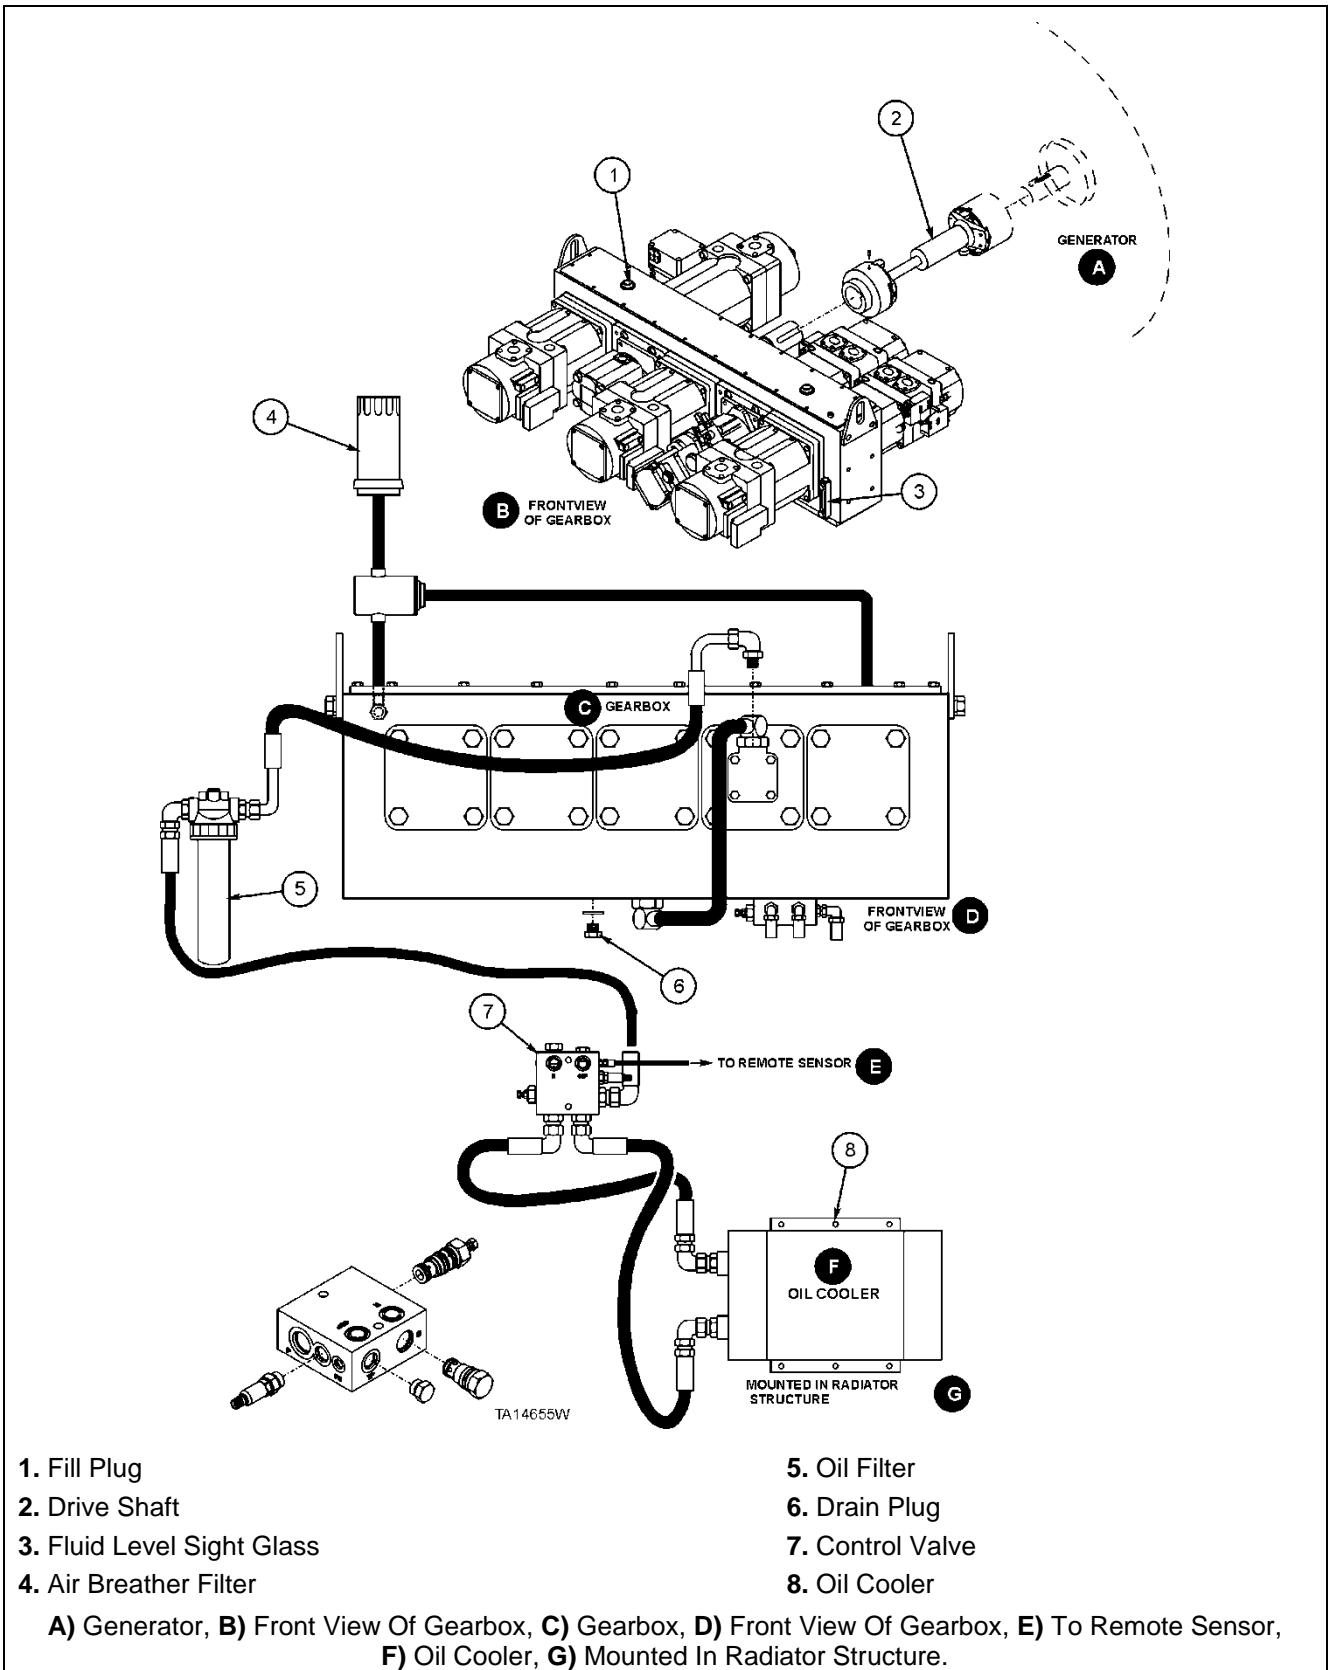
Hydraulic pump drive (gearbox) service points (typical gearbox and pump layout shown)
